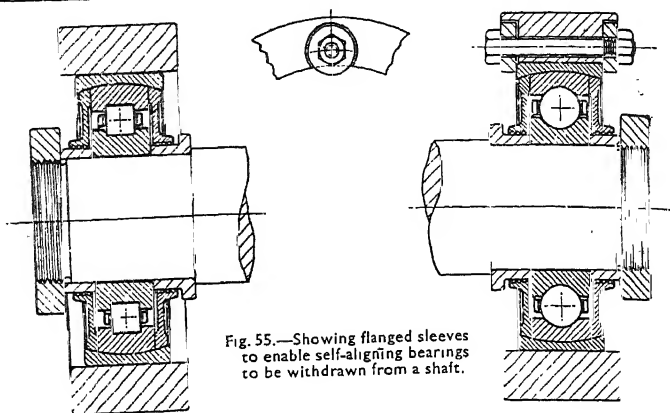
Showing flanged sleeves to enable self-aligning bearings to be withdrawn from a shaft.
